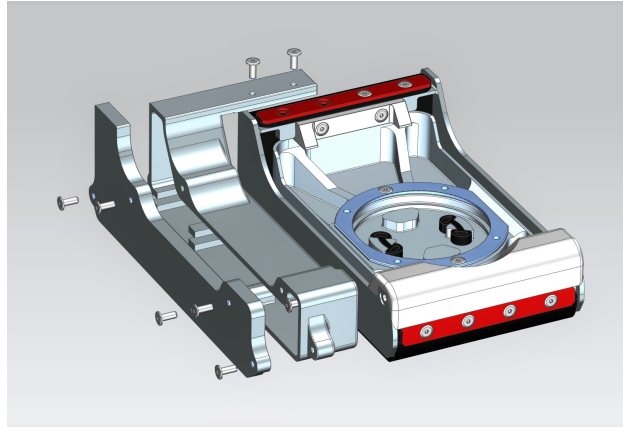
Exploded view of the lateral case with its cover and the foot sole.
